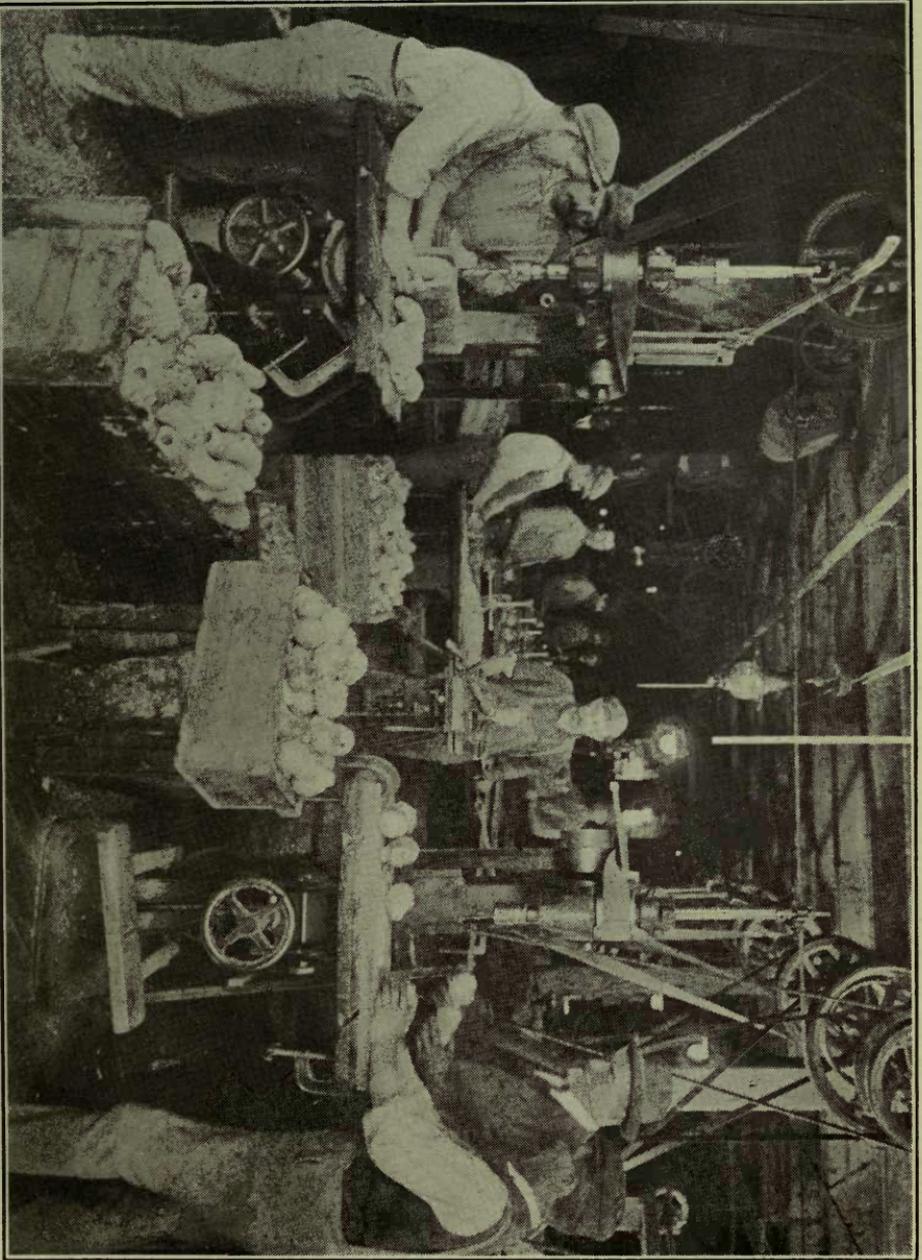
Woodworking department of a toy manufacturer. Making wooden dolls.
